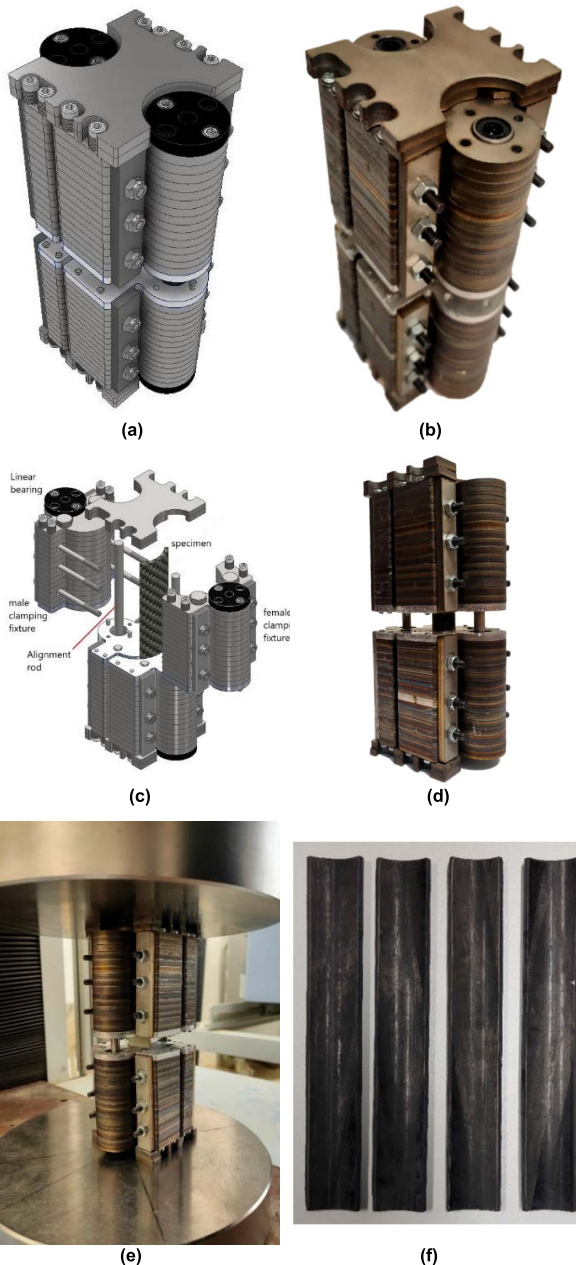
Material characterization and testing features; (a) 3D CAD model of the designed fixture; (b) The assembly of the manufactured fixture; (c) Exploded view of the assembly; (d) The specimen being fixed in the fixture; (e) the assembly under loading in the testing machine; (f) the tested specimen's shape.
